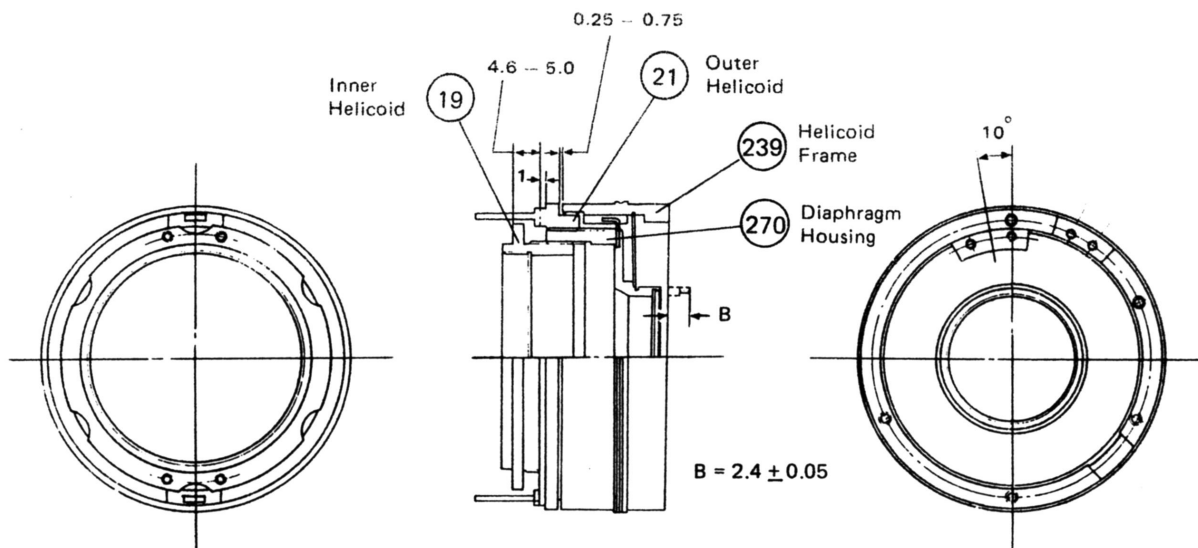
Helicoid Assembly Critical Dimensions, Universal Mount
